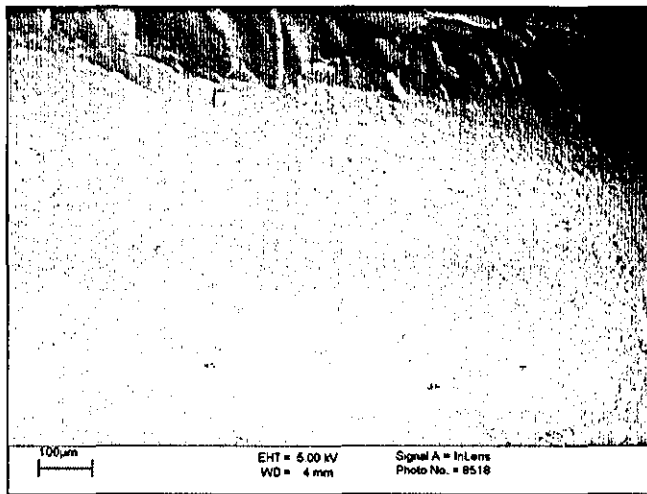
Fracture surface of partially sintered SFD14 compact.
